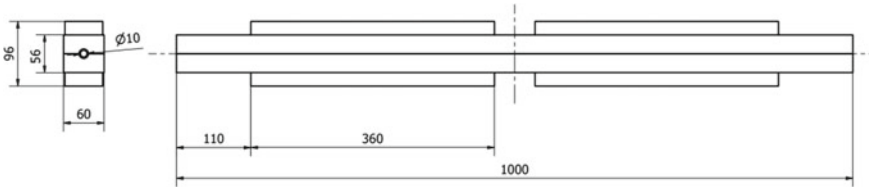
The general dimension of pultrusion die with surface heaters mounted
